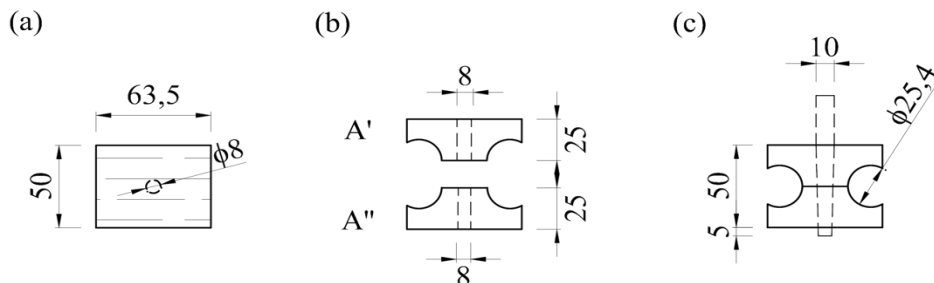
Schematic representation of 2nd phase specimen (dimensions in mm) (a) top view; (b) front view before RFW; (c) front view after RFW.
